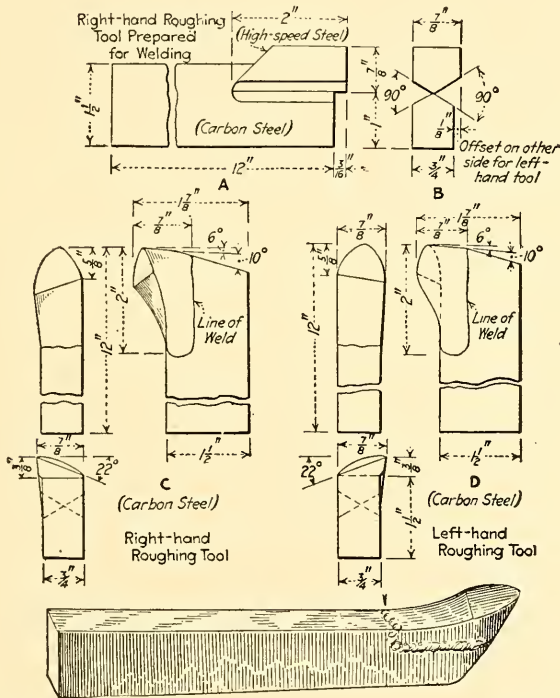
Details of Tools with Oxy-acetylene-welded Points.
